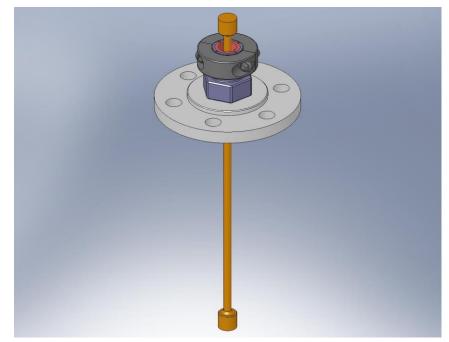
Shaft collar must be placed over the end of the Flexure Mount. Do not tighten the screws, yet.
